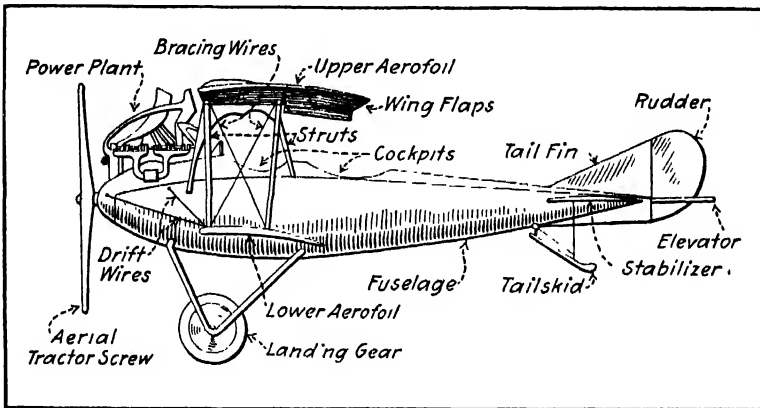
Side View of Typical Biplane, Showing Important Parts.
